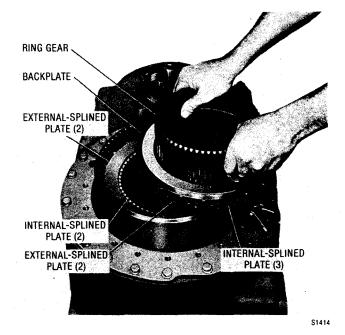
Removing high-range ring gear and low-range clutch plates (TRT 2221-1, 2421-1)
